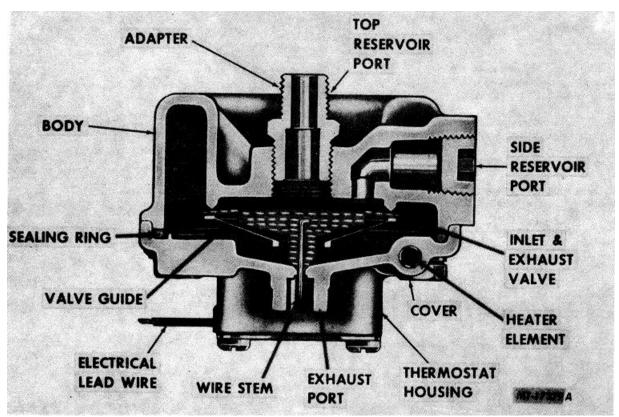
Sectional View of Reservoir Automatic Drain Valve
